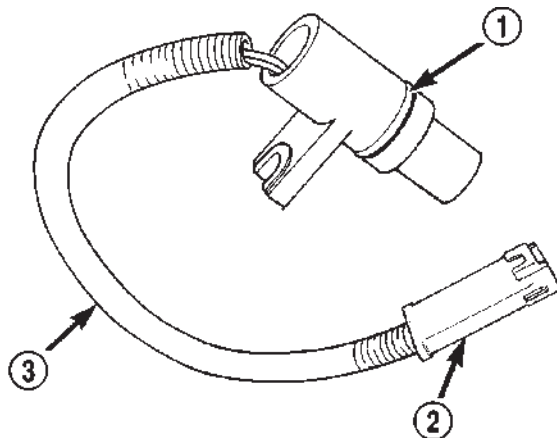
Sensor O-Ring—8.0L V-10 Engine
